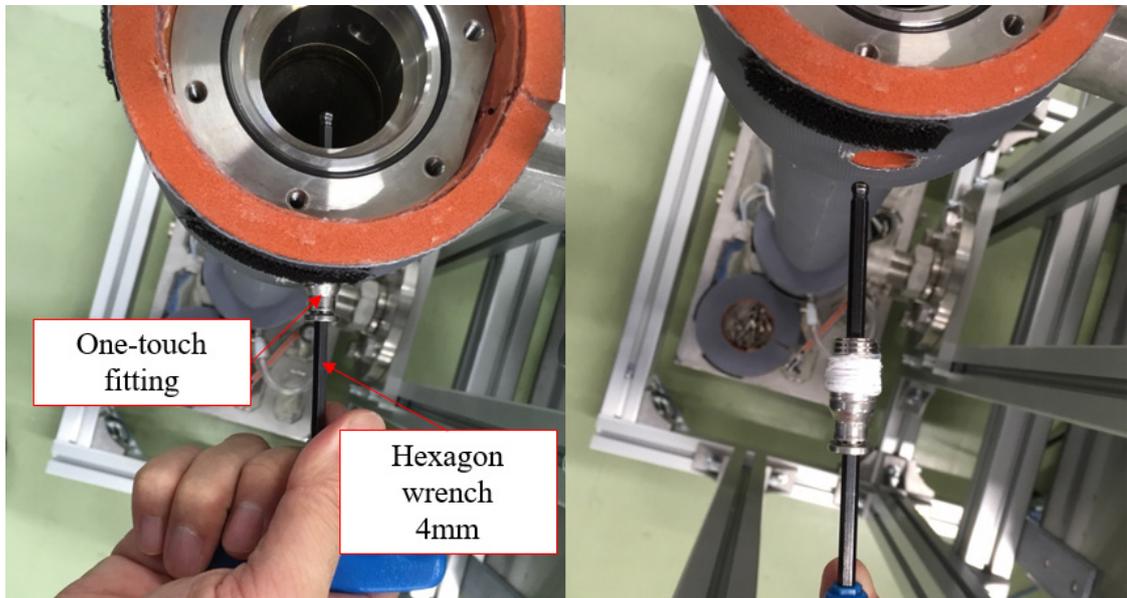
Gas cell fitting (transmitter unit side) before (left) and after (right) removing with a hexagon wrench (4mm)
